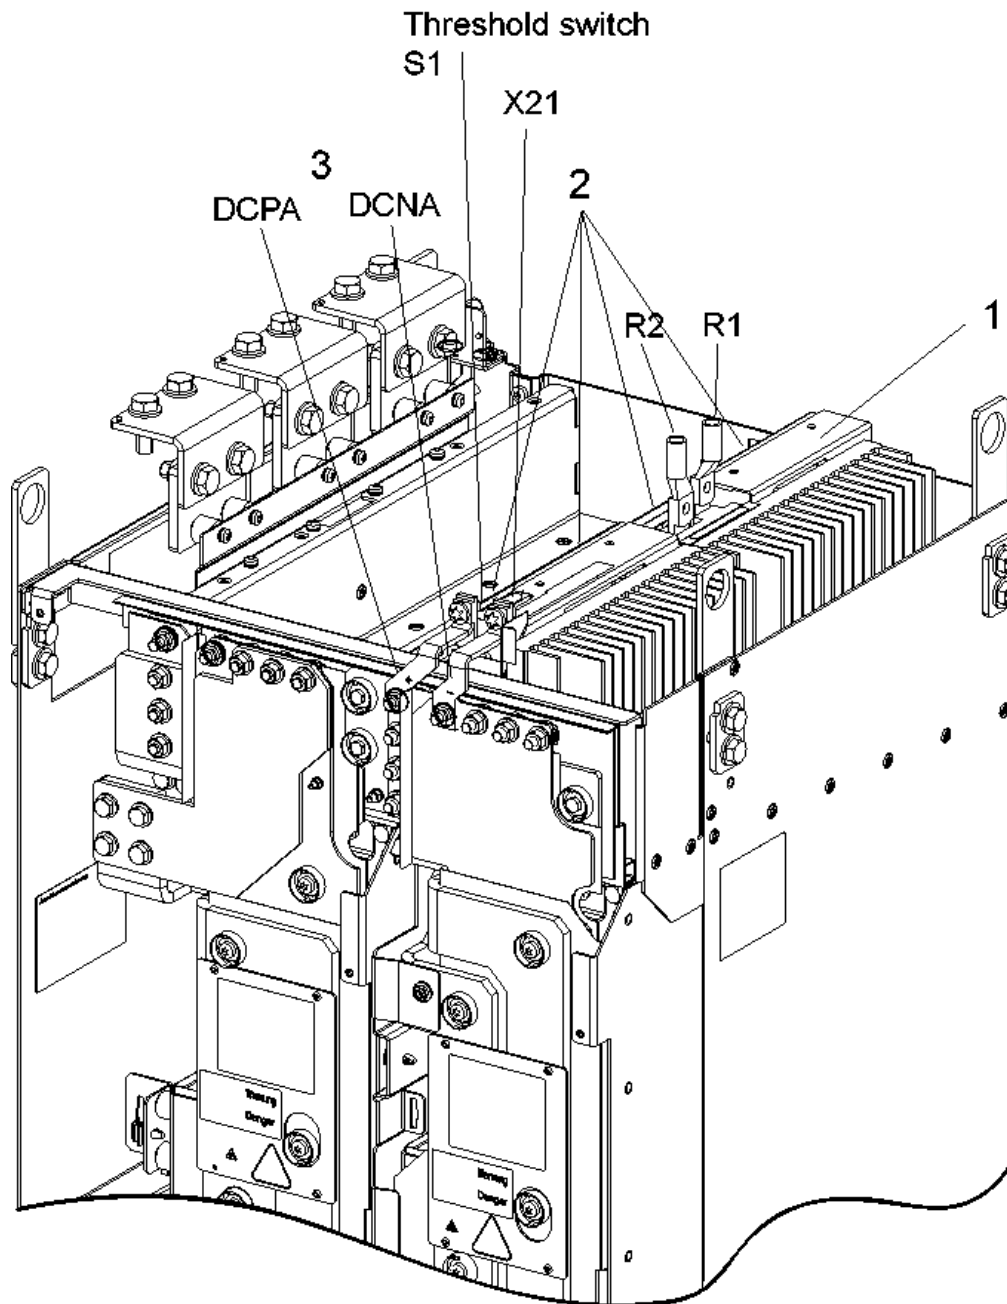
Installing a Braking Module in an Active Line Module or a Motor Module (type HX)
